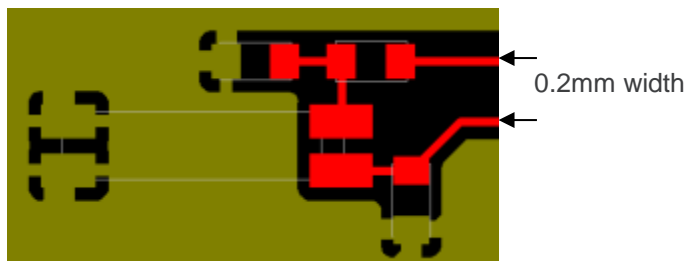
PCB Lay-out for the Crystal MS3V-T1R
